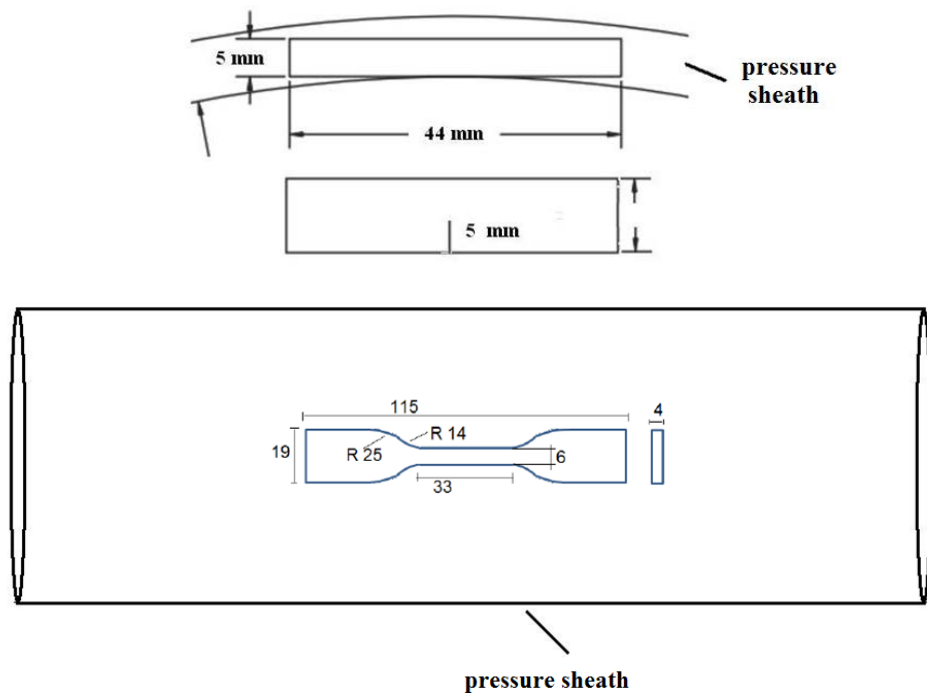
Single-edge-cracked three-point bend fatigue specimens and tensile specimens fabricated from a pressure sheath taken from a flexible pipe.
